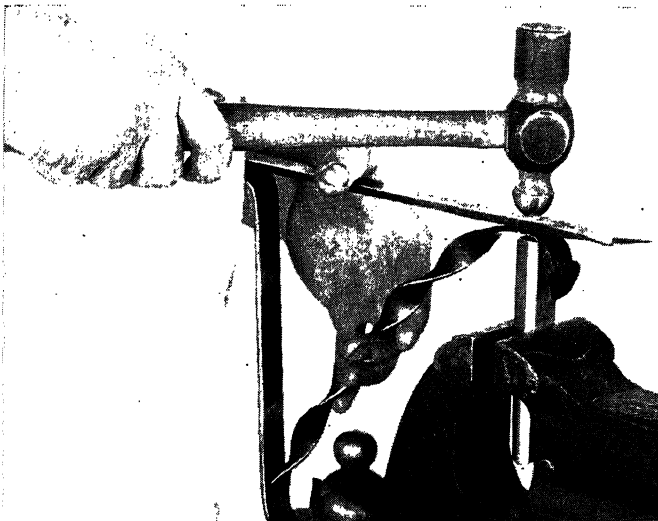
Backing up a round rivet head with a rivet set for protection while riveting
